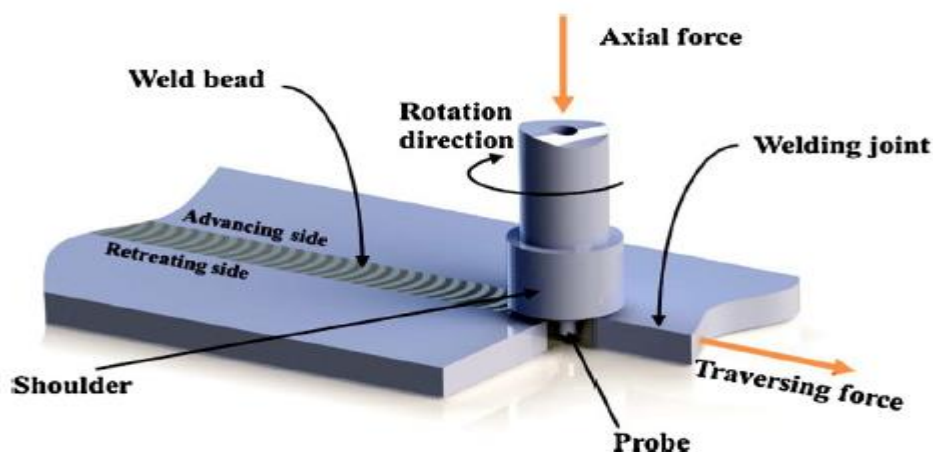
Frictional stir welding of TPC [74]
